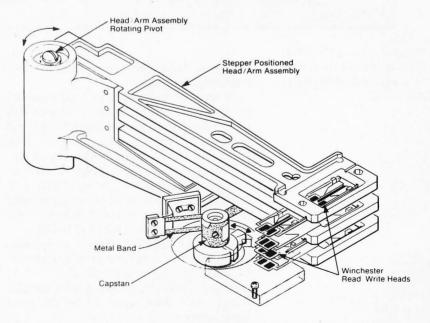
The Shugart SA4000 fixed disk head actuator assembly. A novel coiled-metal band driven by a stepper motor is used to position the head assembly. Graphics courtesy Shugart Associates.
